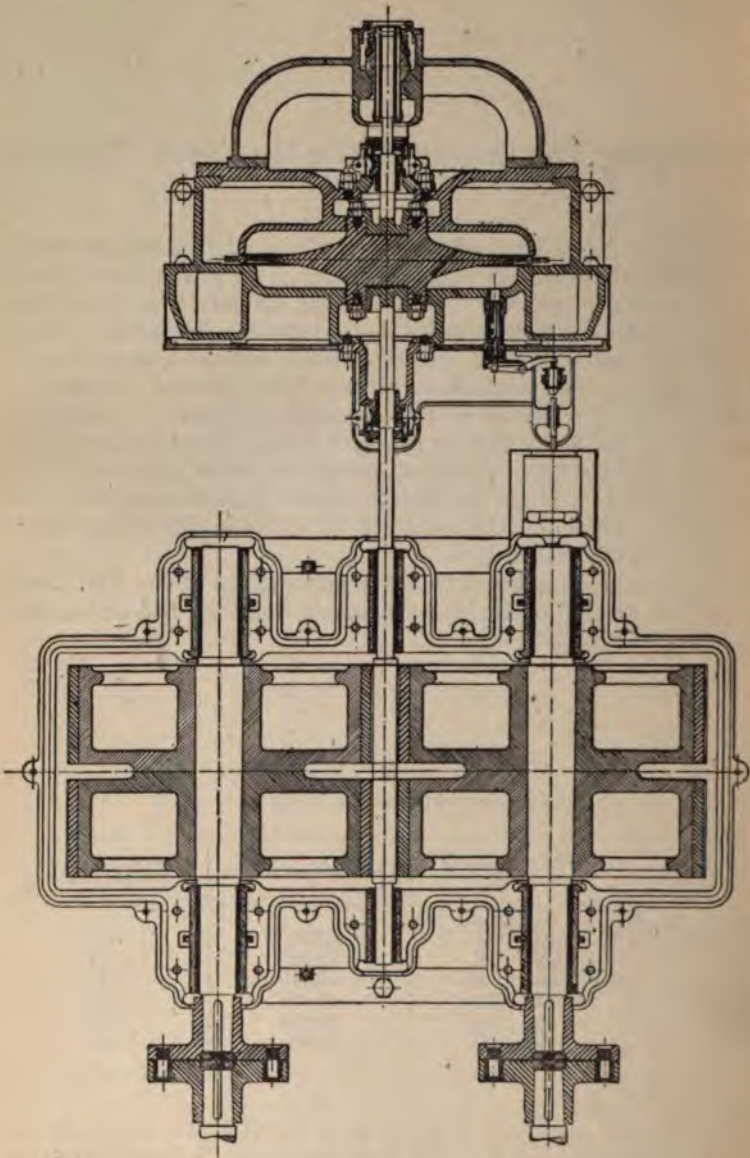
Sectional Plan of De Laval Turbine, its Shaft, and two sets of Reducing Gear Wheels, the Spur Wheels being on the two Driving Shafts shown.
